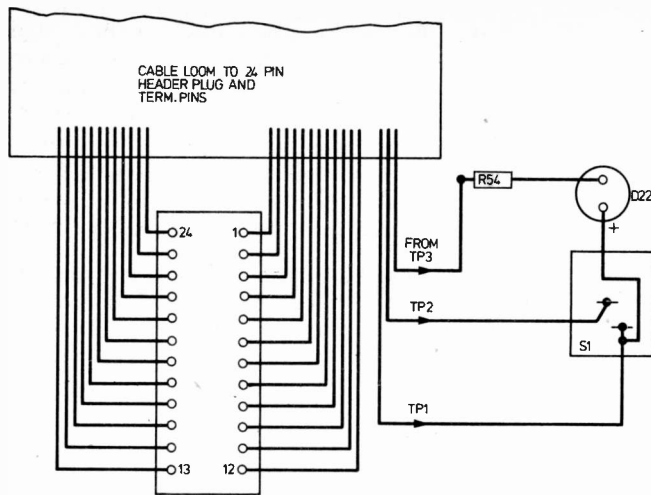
Cable loom arrangement for z.i.f. socket
